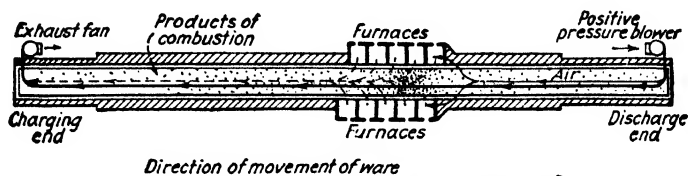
A plan section of a direct-fired tunnel kiln. (American Refractories Institute.)
